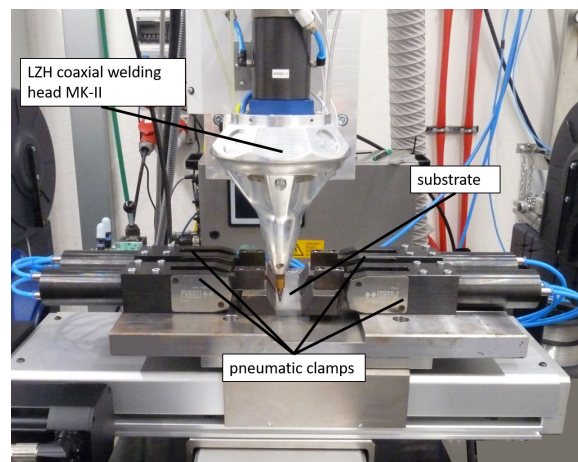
Experimental setup for coaxial laser metal deposition welding with hot-wire
